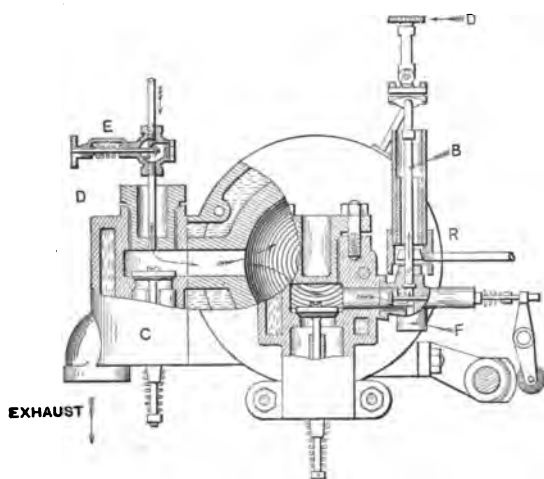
SECTION OF END OF CYLINDER OF STOCKPORT ENGINE.
